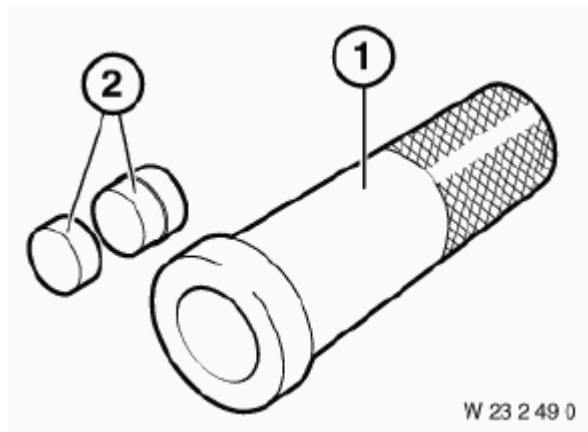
Impact Bush And Slip Sleeve (23 2 490)
